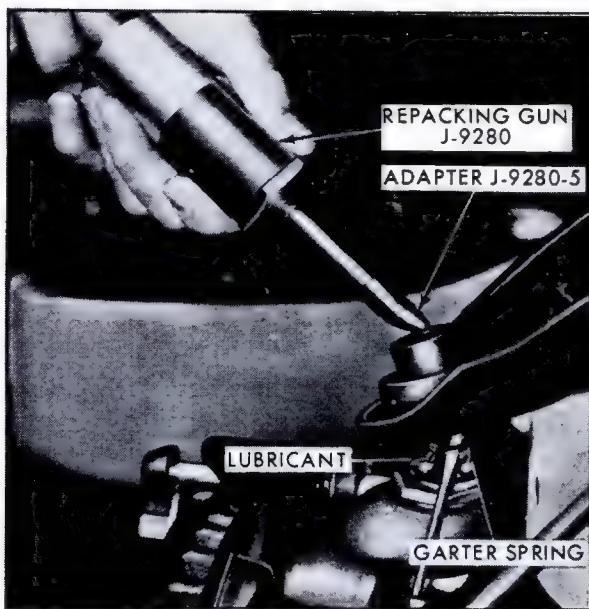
Repacking Front Upper Spherical Joint Seal
